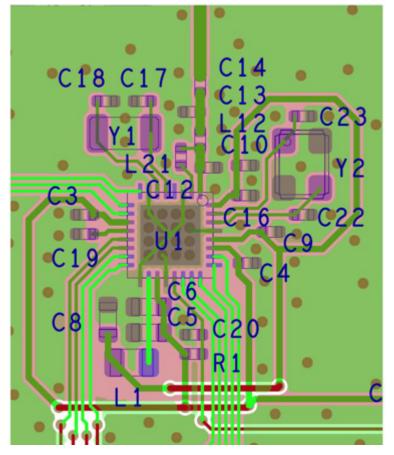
4 × 4 External Single-ended (4XS) Layout
